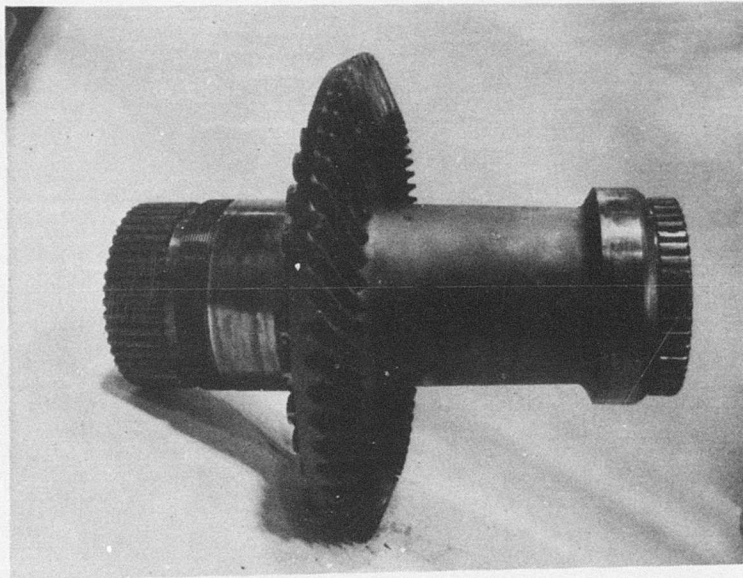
Main input gear following 4.0-hour emergency lubrication run.
